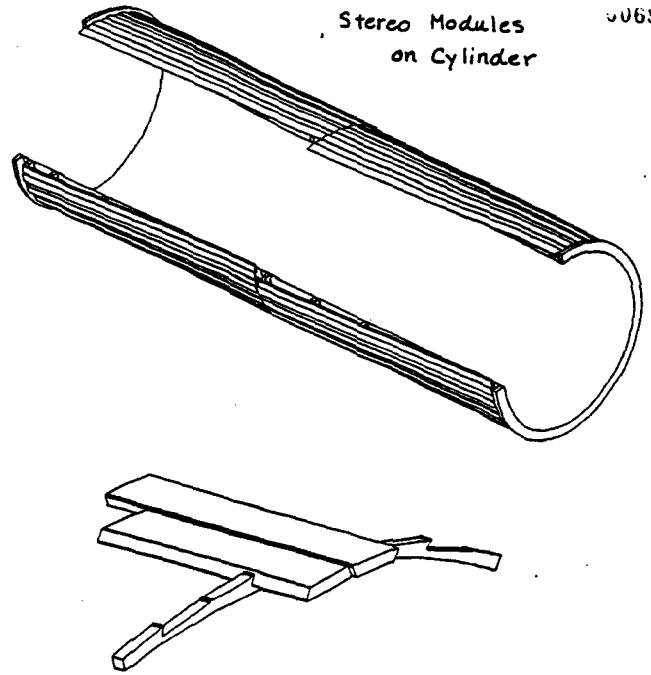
a) the stereo superlayer as seen in an isometric view. b) Detail of a stereo layer at the midpoint of the cylinder.
